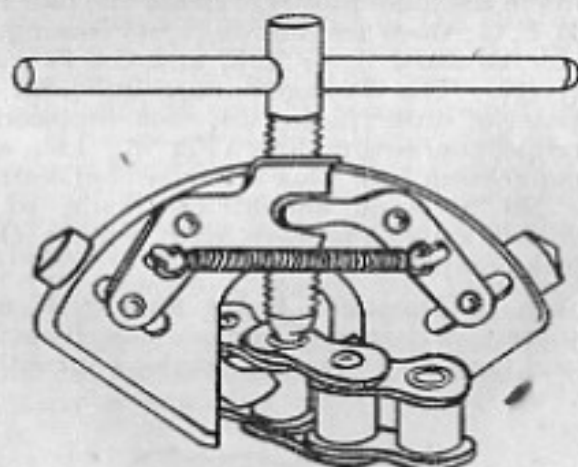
PENNANT CHAIN RIVET EXTRACTOR.
